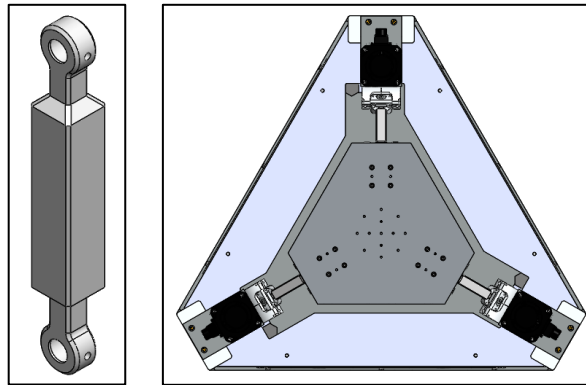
The old version of the shaker: a) Single link; b) Assembly
